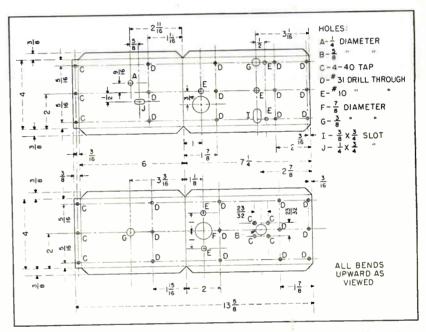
Layout of two L-shaped shields that form the metal cabinet. All dimensions are given in inches
